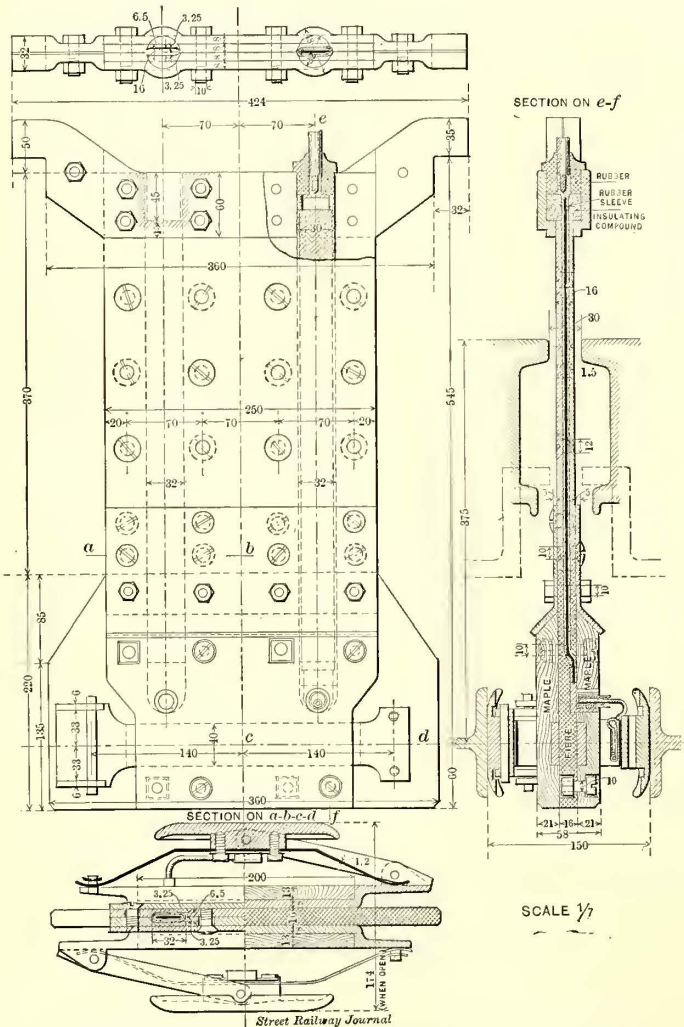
SECTIONS AND SIDE ELEVATION OF PLOW
